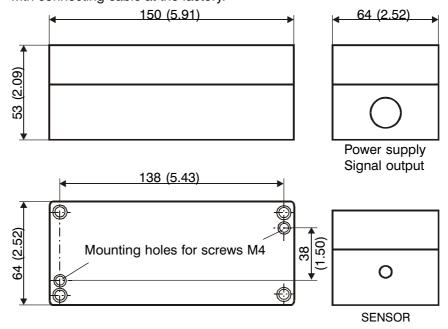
Dimensional drawing controller NLS3181 with connecting elements
